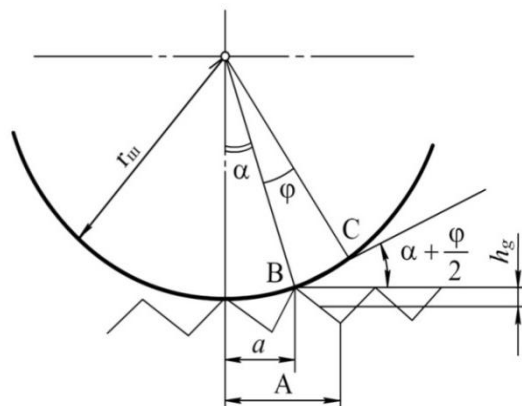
Scheme of the contact protrusions of the defect layer with a ball (with defected layer.)
